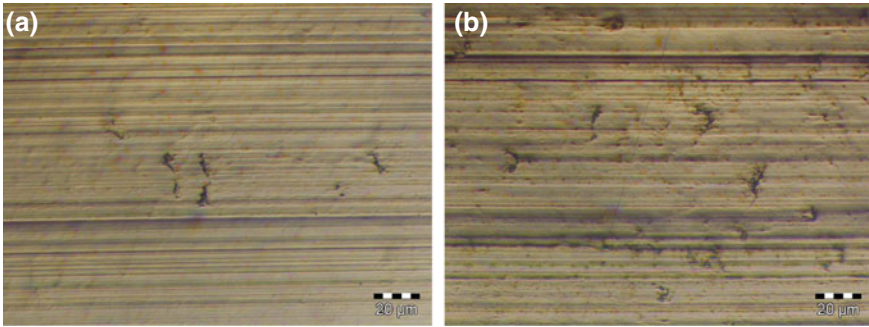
Surface defect feed marks, smearing, surface cracks and cavities on machined surfaces
